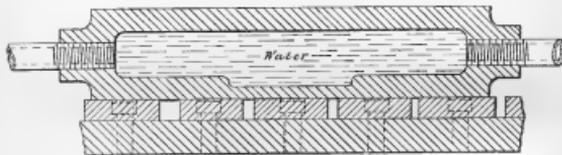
Wicks rotary typecaster; soft moulds. Scale: full size.
